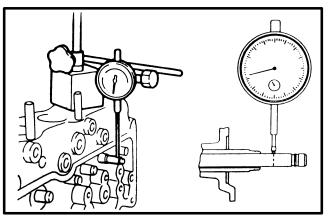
CHECK THE VALVE GUIDE CLEARANCE
